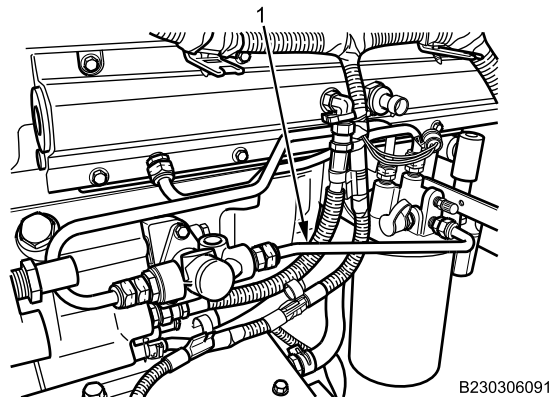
Fuel Filter Inlet to Supply Pump Inlet Fuel Line.
